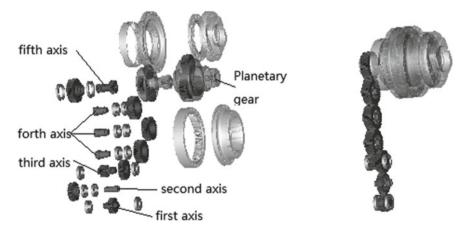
Preliminary plan for assembly of transmission gear of cutting unit
